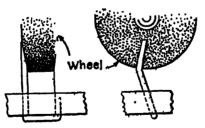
PRINCIPLE OF PLOW GRIND-ING CARD CLOTHING WIRES
